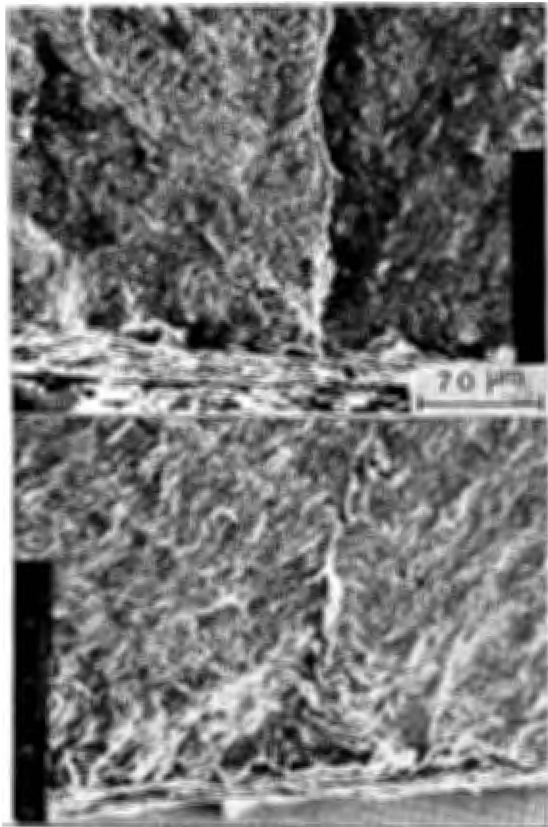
Enlarged view and matching fractograph of Fig. 16
